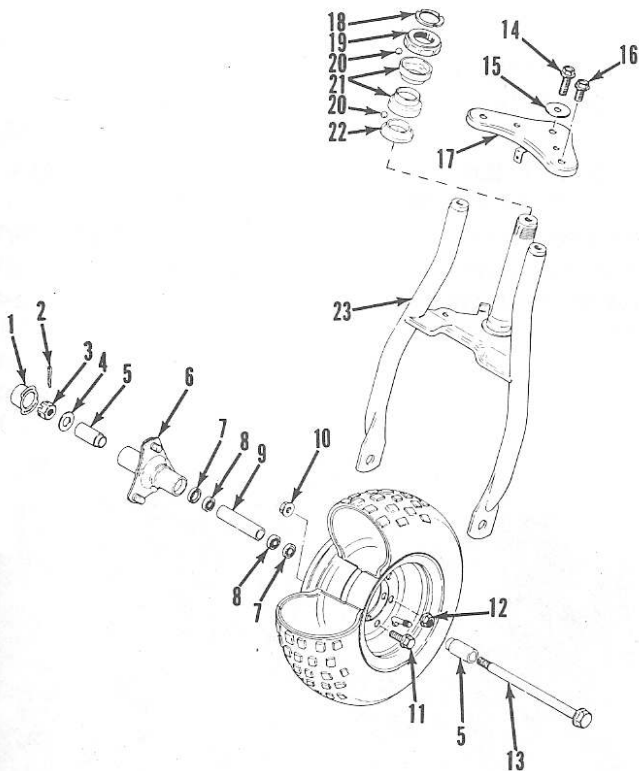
Exploded view of steering and front axle assembly used on ALT50 models.
